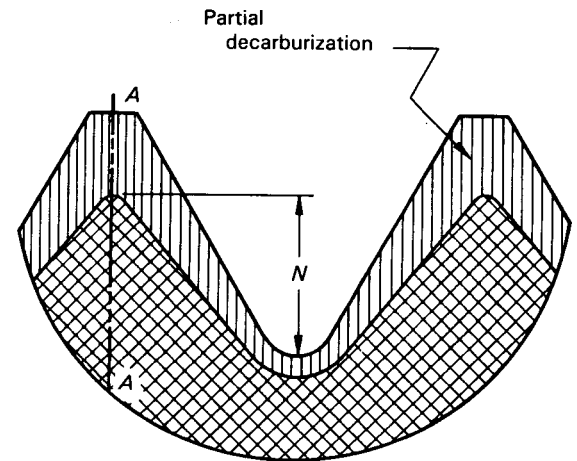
MICROSCOPIC MEASUREMENT OF THREAD DECARBURIZATION
